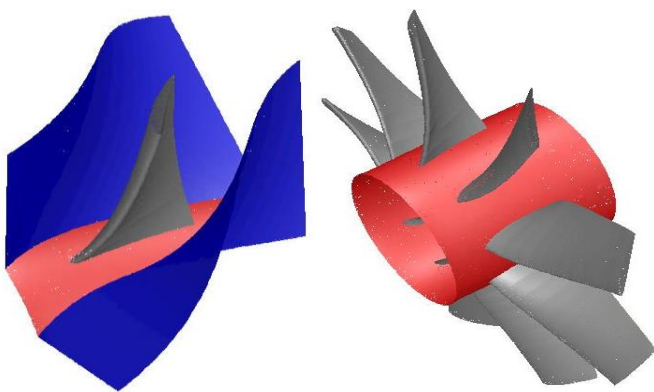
Rotor of the axial fan without tip clearance; (a) periodic channel, (b) complete rotor.
